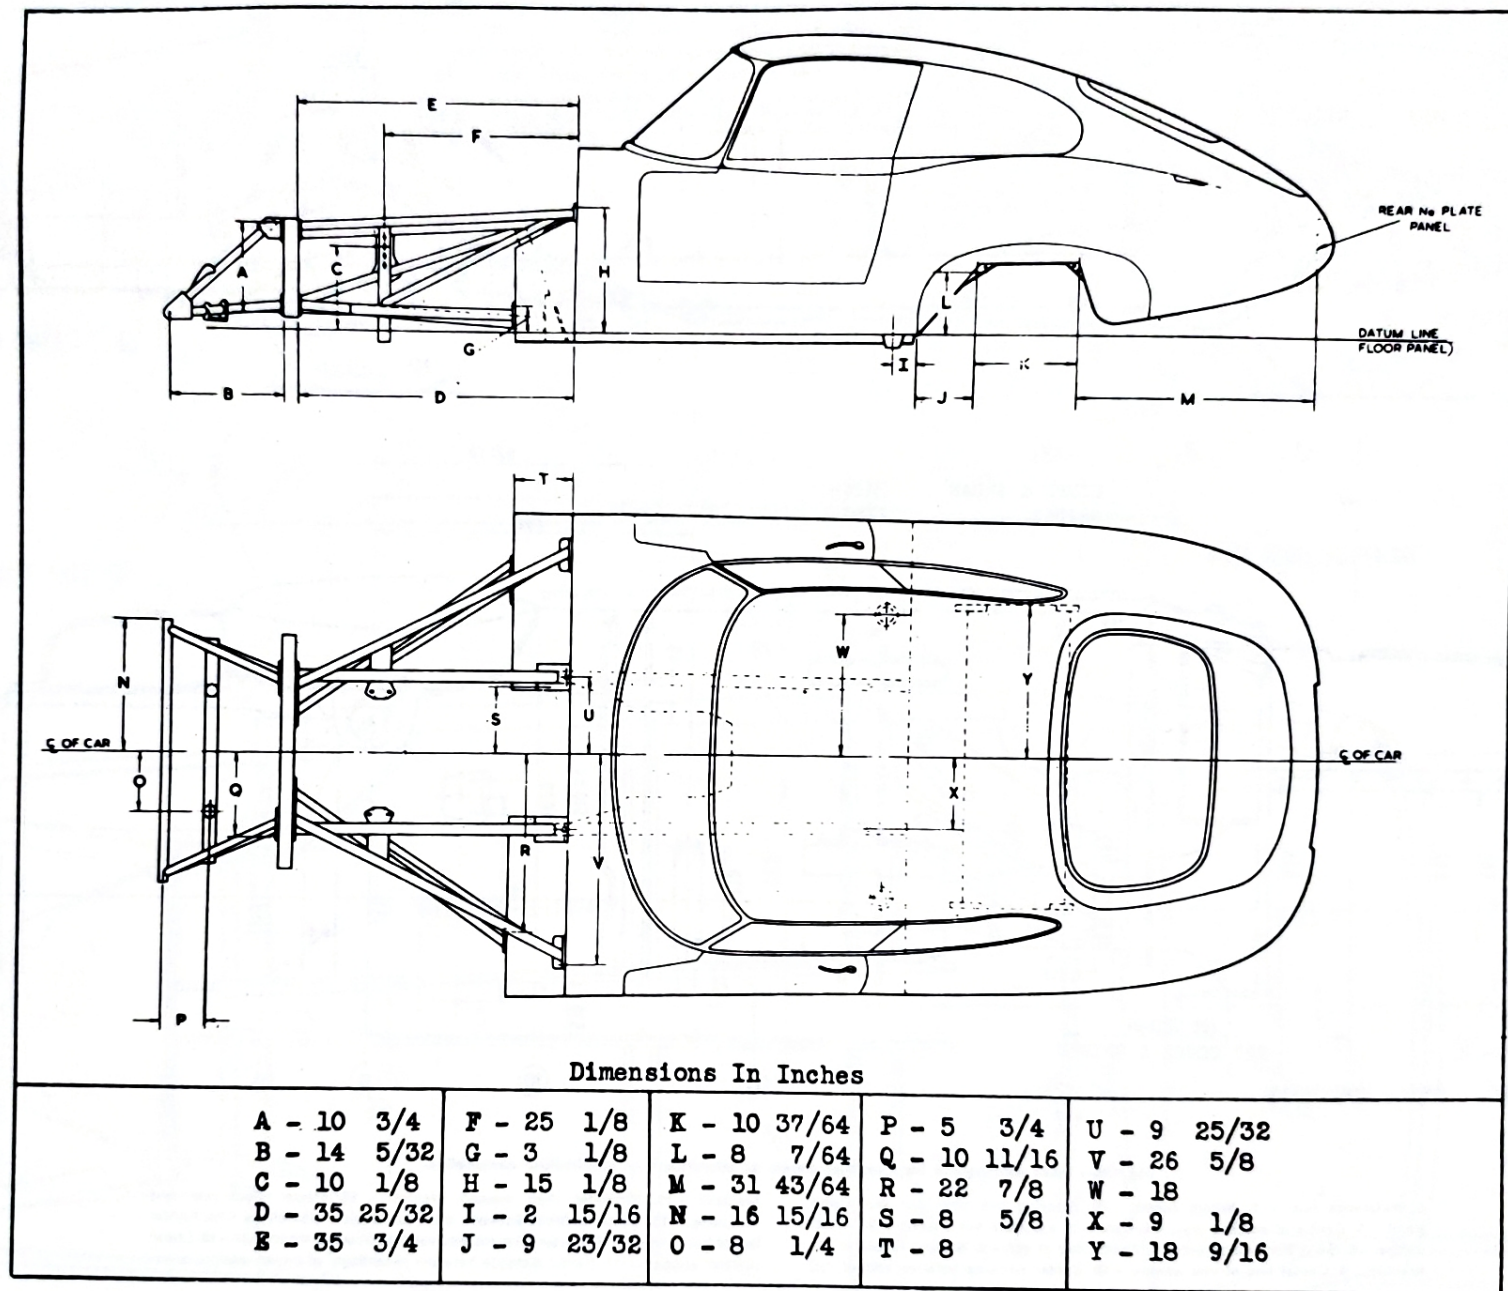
Main dimensions for checking points of attachment of mechanical assemblies.
